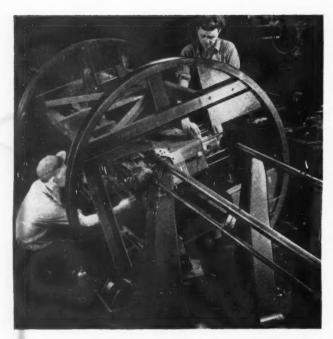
Use of Conveyor Tracks of Round Steel Shafting Provides for Swinging Crankcase to Most Convenient Angle for Assembling Pistons and Connecting Rods
